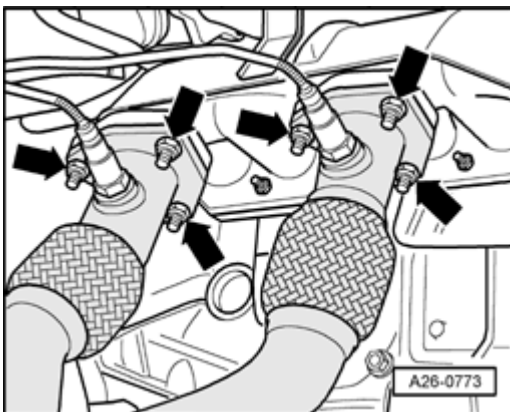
Unbolting Front Exhaust Pipe At Exhaust Manifold
